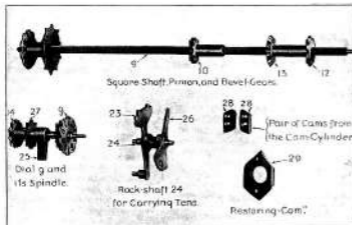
A FEW OF THE PARTS OF THE CALCULATING MACHINE
